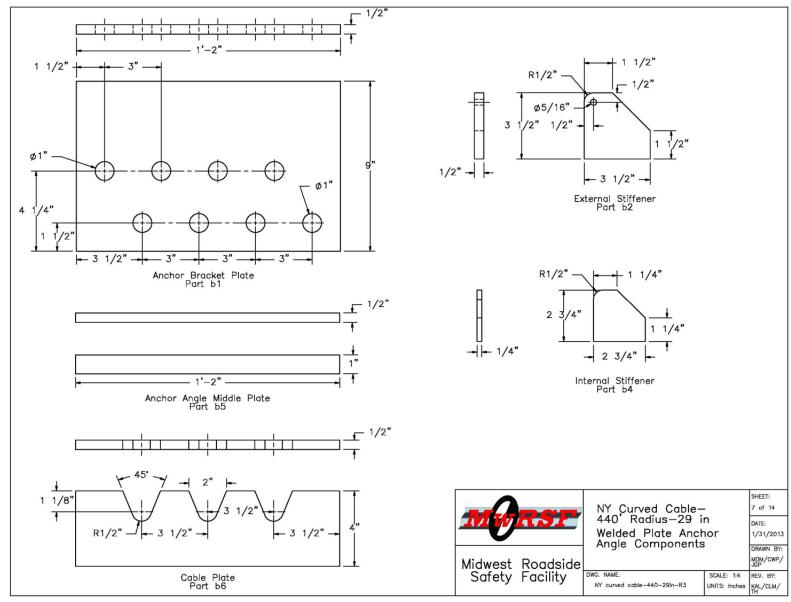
Cable Anchor Bracket Component Details, Test No. NYCC-3
